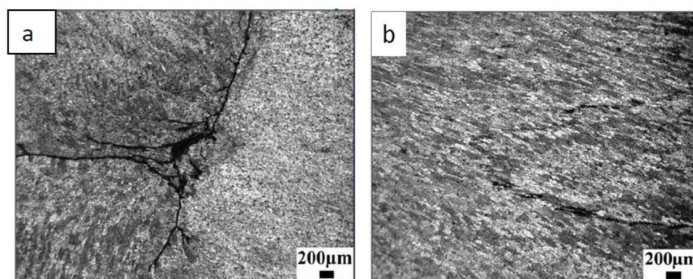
Defects in R-DSFSW welds at 1400 rpm (a) Cracks; (b) Partial bond.
